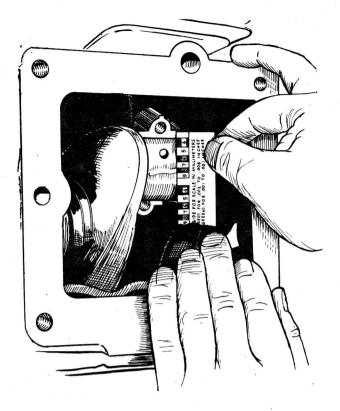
MEASURING BEARING CLEARANCE WITH PLASTIGAGE
